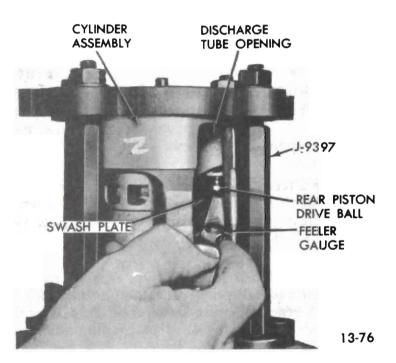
Checking Clearance Between Rear Piston Drive Ball and Swash Plate
